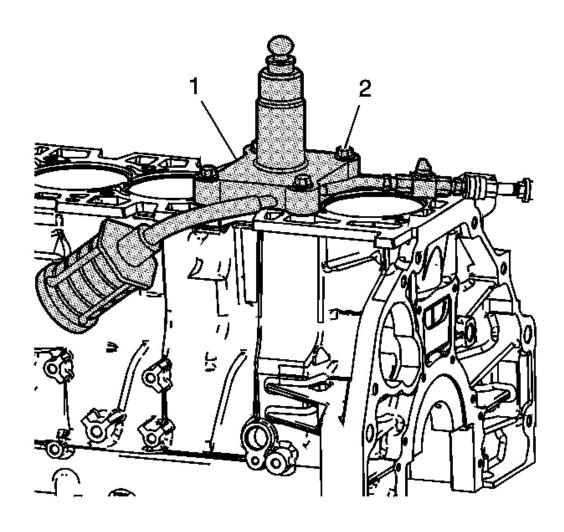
Trim Tool Assembly Alignment Courtesy of GENERAL MOTORS CORP.
